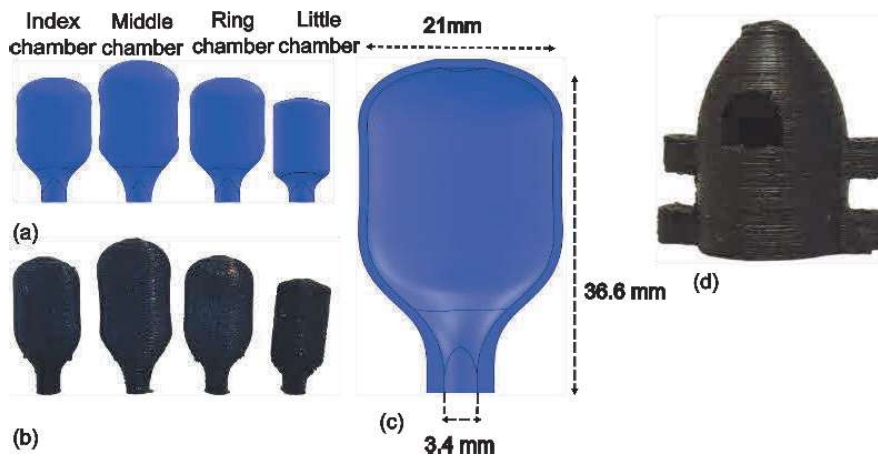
Design and prototypes of chambers and thimbles. (a), (c) showcase CAD models, while (b) and (d) depict prototypes of chambers and thimbles, respectively.
